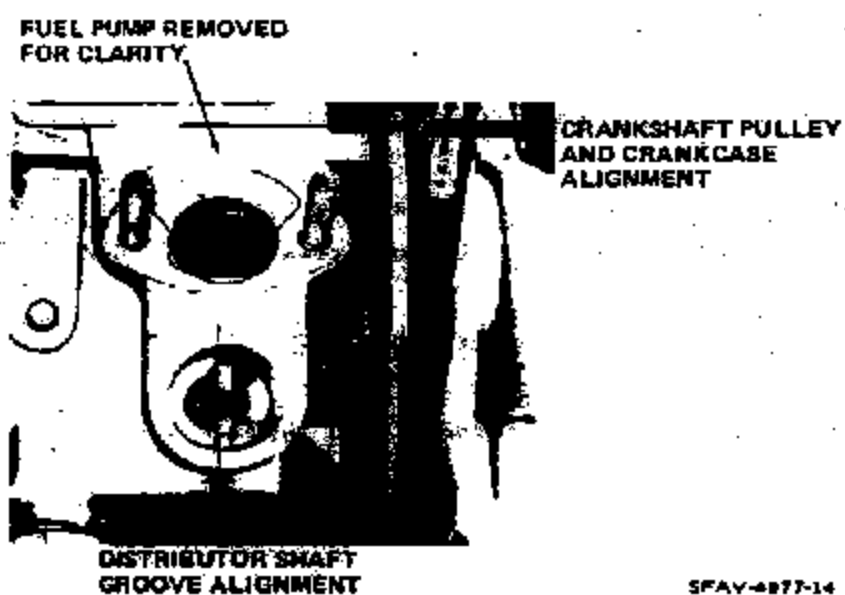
Distributor Shaft and Crankshaft Pulley Alignment.
